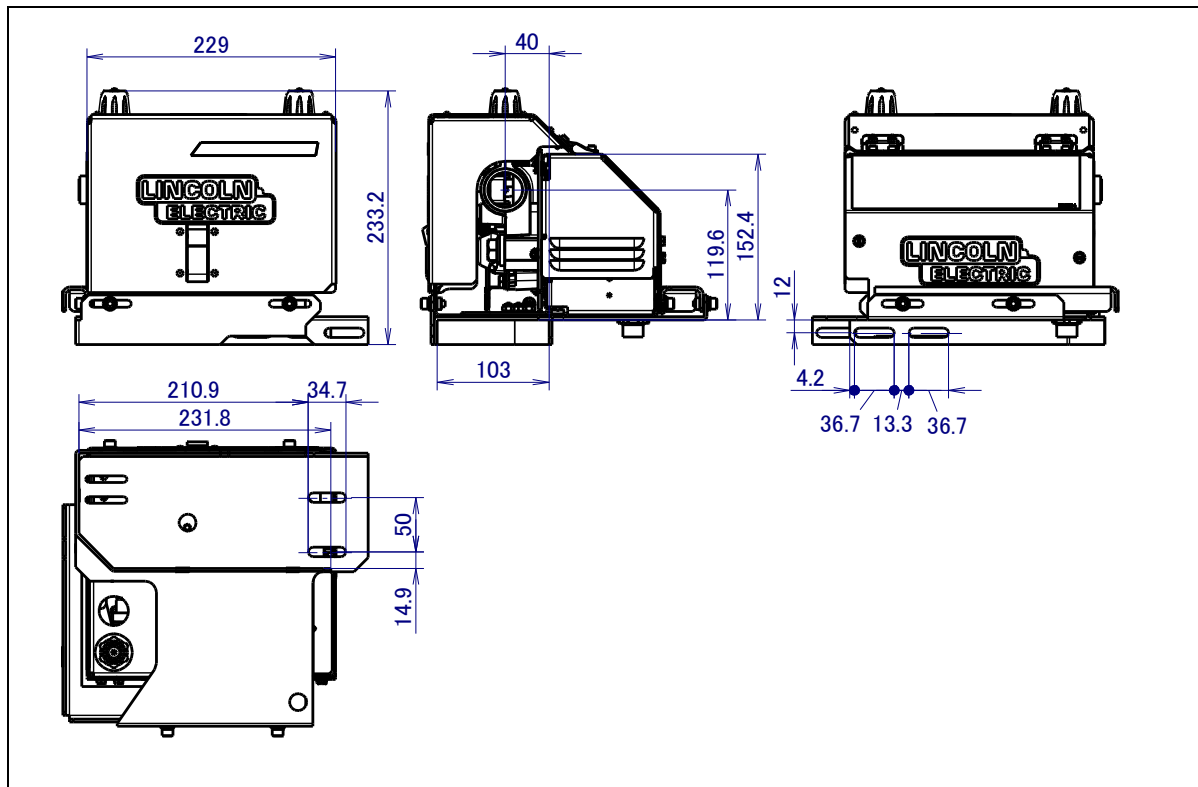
(b) Wire feeder external dimensions (A05B-1291-H201)
